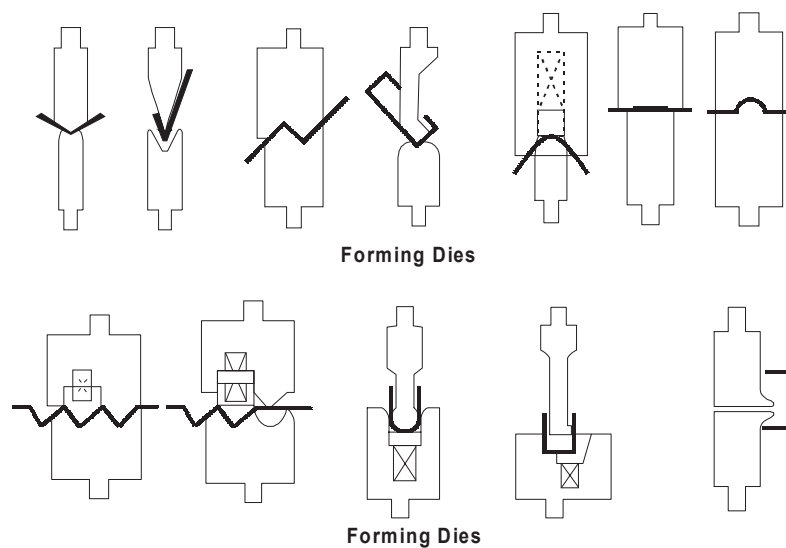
Kinds of sheet metal bends using press brake dies
